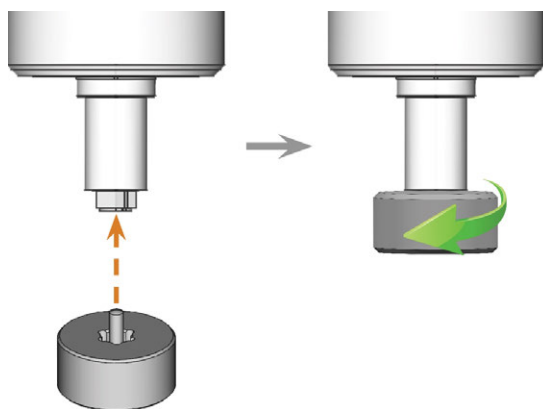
UNTIGHTENING THE COLLET CHUCK WITH THE KNURLED NUT
